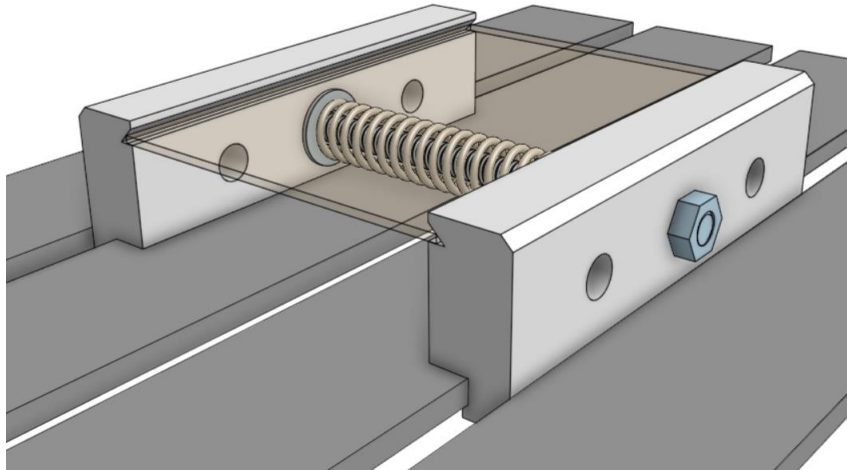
PCB board fixturing specifically designed for 100x70mm PCBs.
